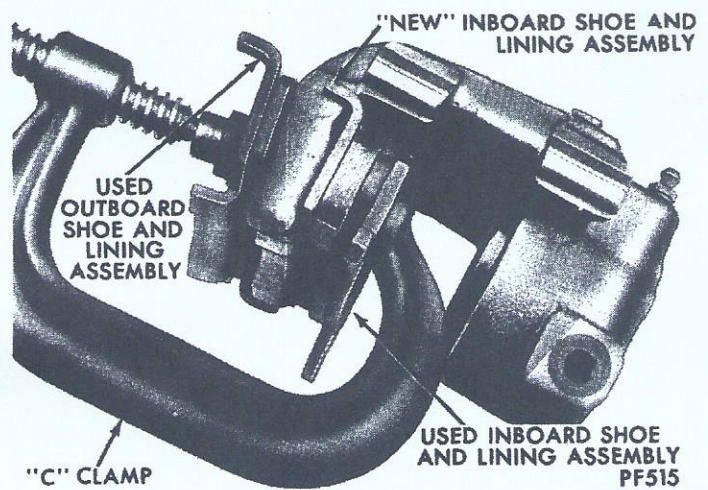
Attaching Shoe to Caliper Fingers with "C" Clamp
